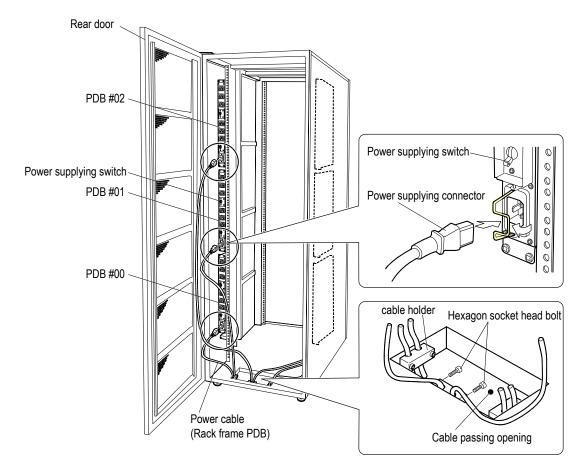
Connecting Power Cables (Rack Frame PDB)
